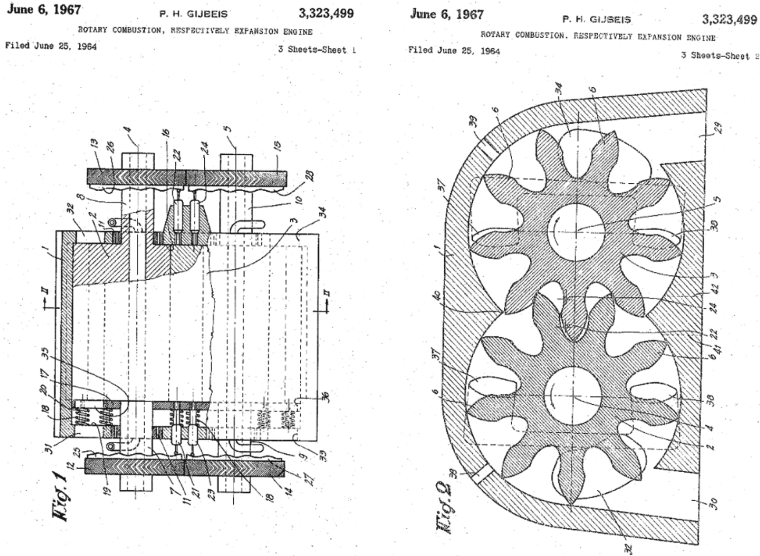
Synchronizing gears at the two sides of the motor (left) and epicyclic gears forming working chambers (right) [8].
